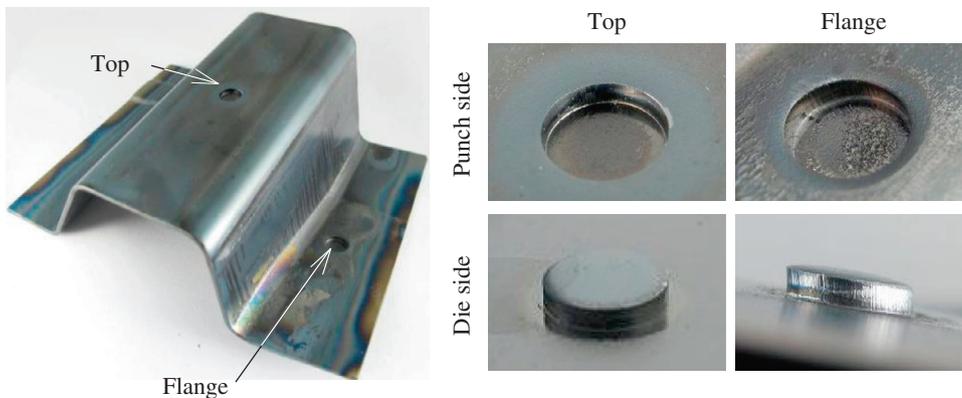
Hat-shaped sheet having semi-punched top and flange.
